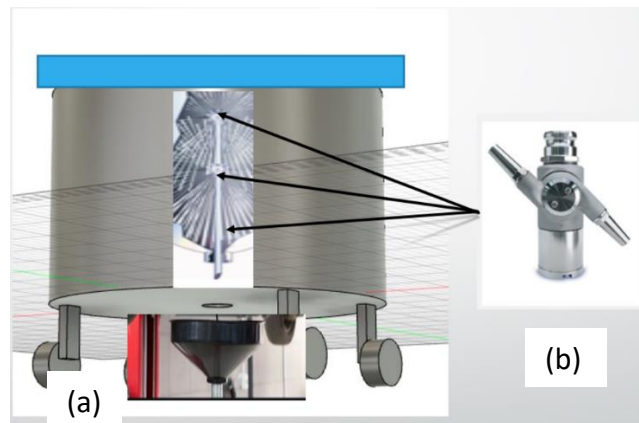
Pressurized Water Assembly (a) Using pressurized water to clean the mixing bowl with the funnel at the bottom to collect the propellant residual waste, (b) Spraying Nozzle Mechanism
